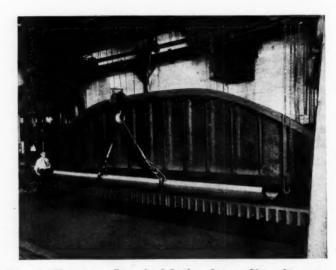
Forming a 5 in. thick boiler plate to 60 in. diameter
